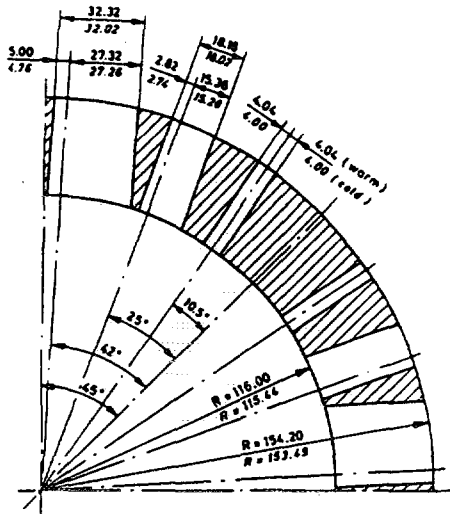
ISR quadrupoles: cross-section of coil with warm and cold dimensions [13]
